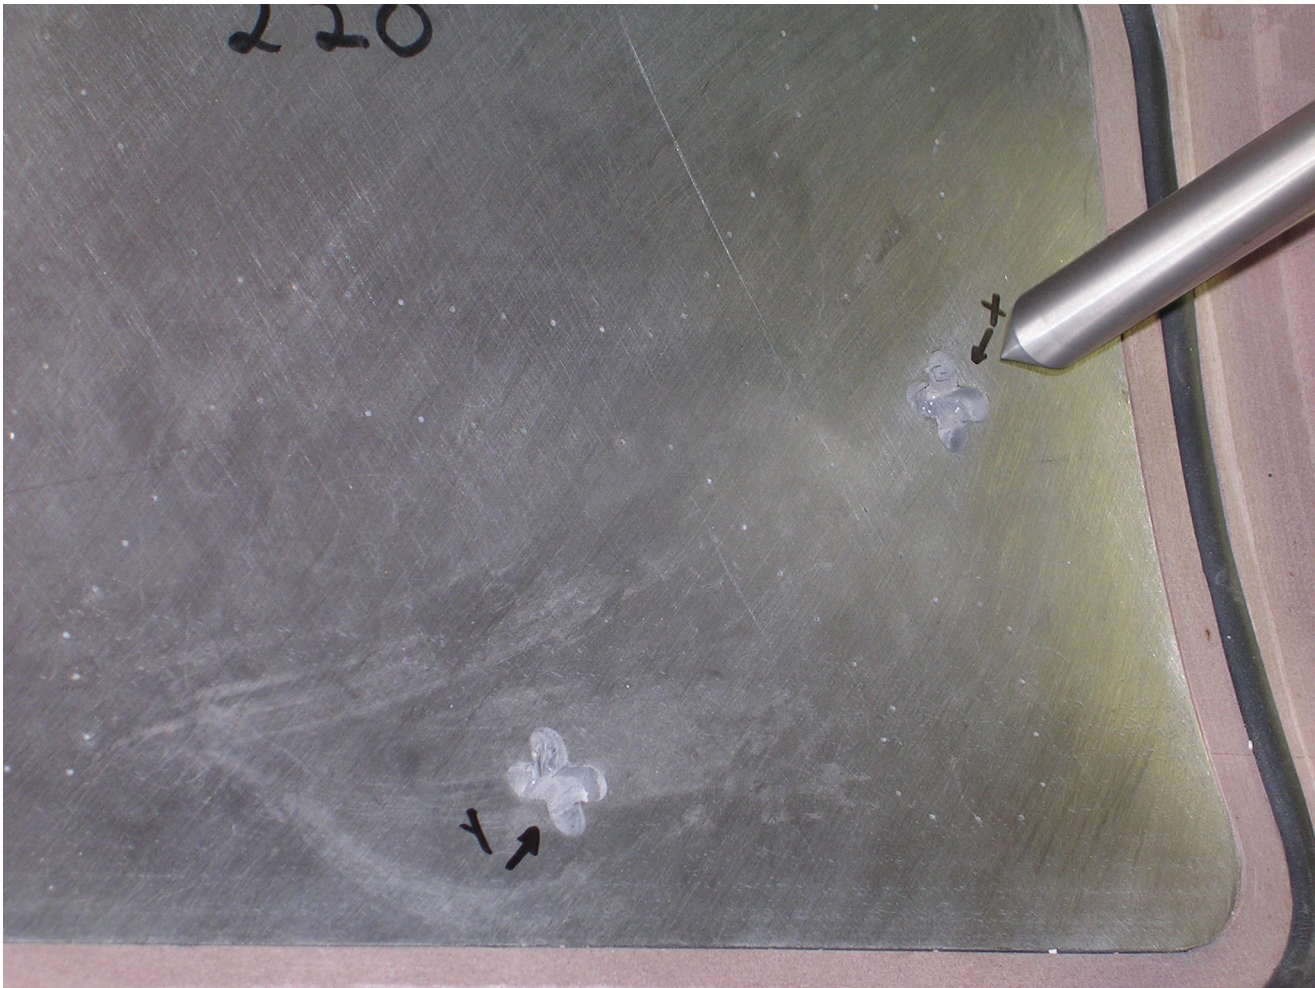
A sample part fixture. Figure shows robot with precision pointer attached, teaching Fixture Coordinate System points. The Fixture Insert was designed to have three locating features machined into it to be used at teaching points.
